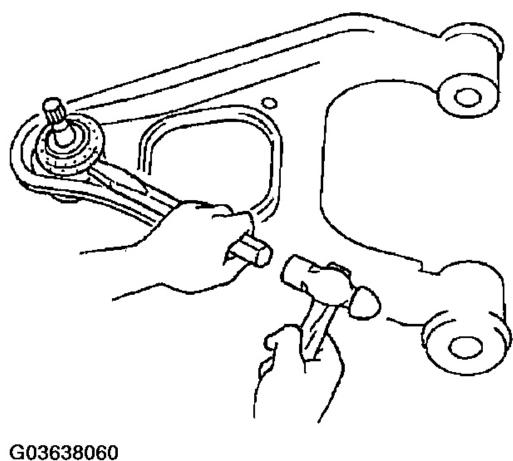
Identifying Upper Arm Ball Joint From Knuckle Courtesy of MAZDA MOTORS CORP.
